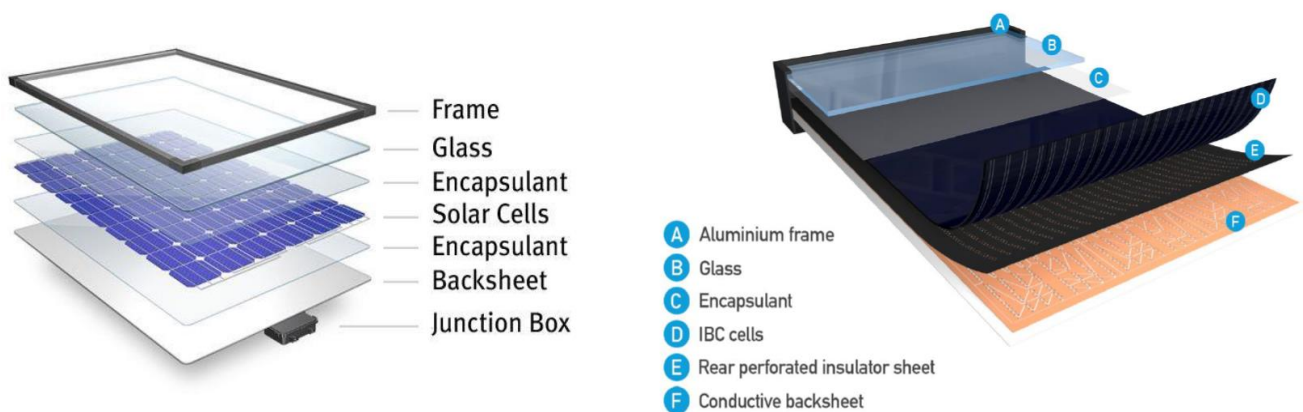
(left) Exploded view of the conventional module technology, (right) stratification of the back-contacted module with CB technology, [10].
